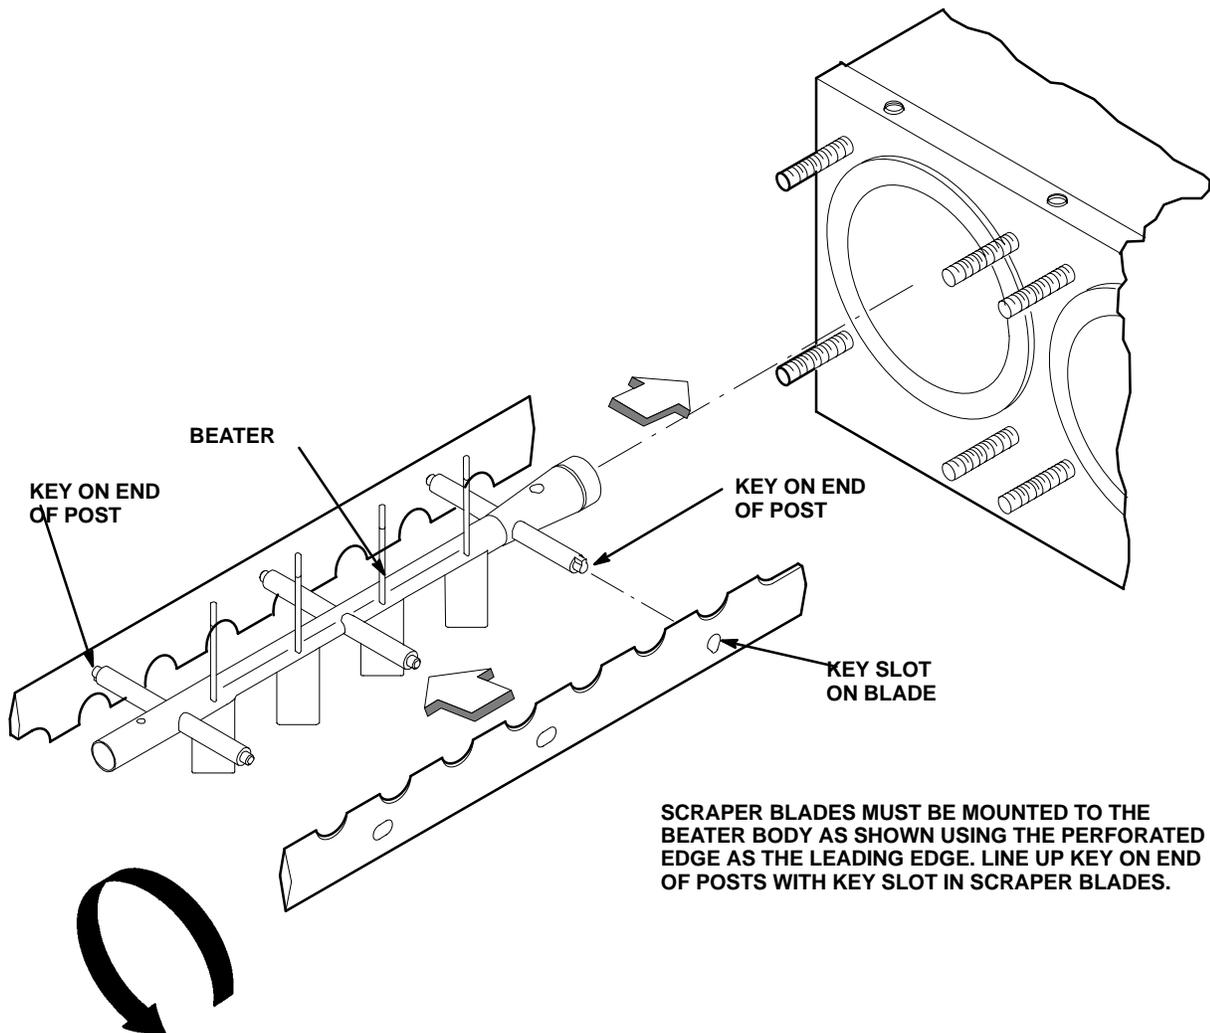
BEATERS AND SCRAPER BLADES INSTALLATION
